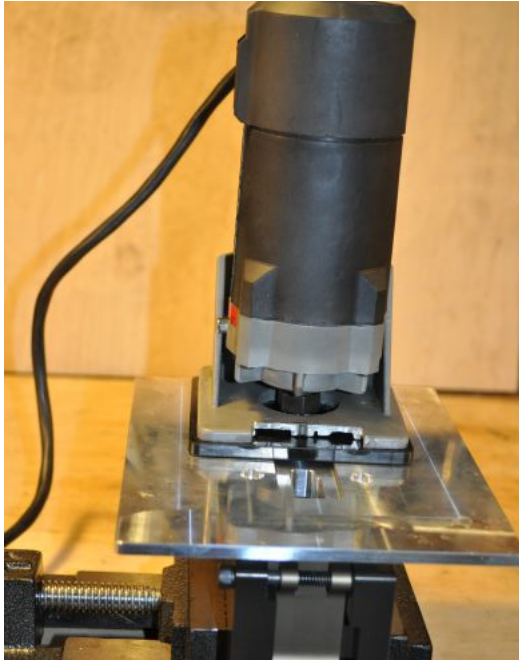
router inserted into lower hole, careful to start the router without touching the lower
